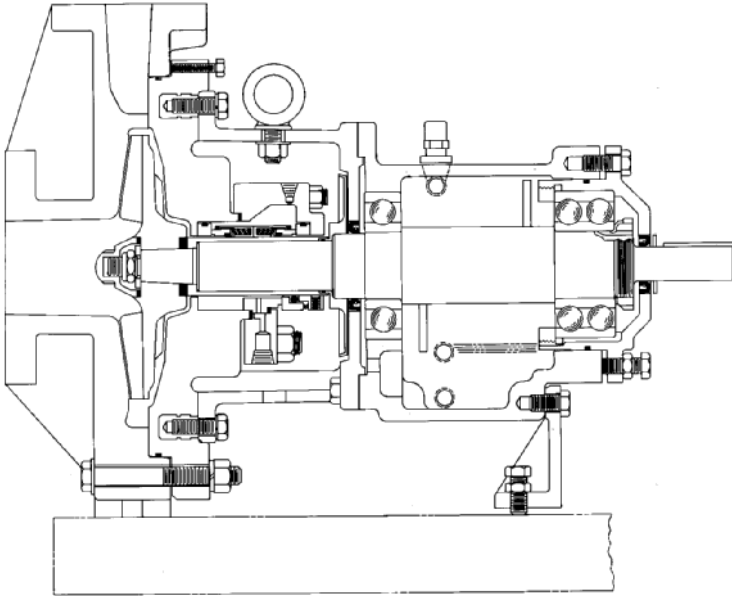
End-suction pump with semi-open impeller (Flowsolve Corporation)
